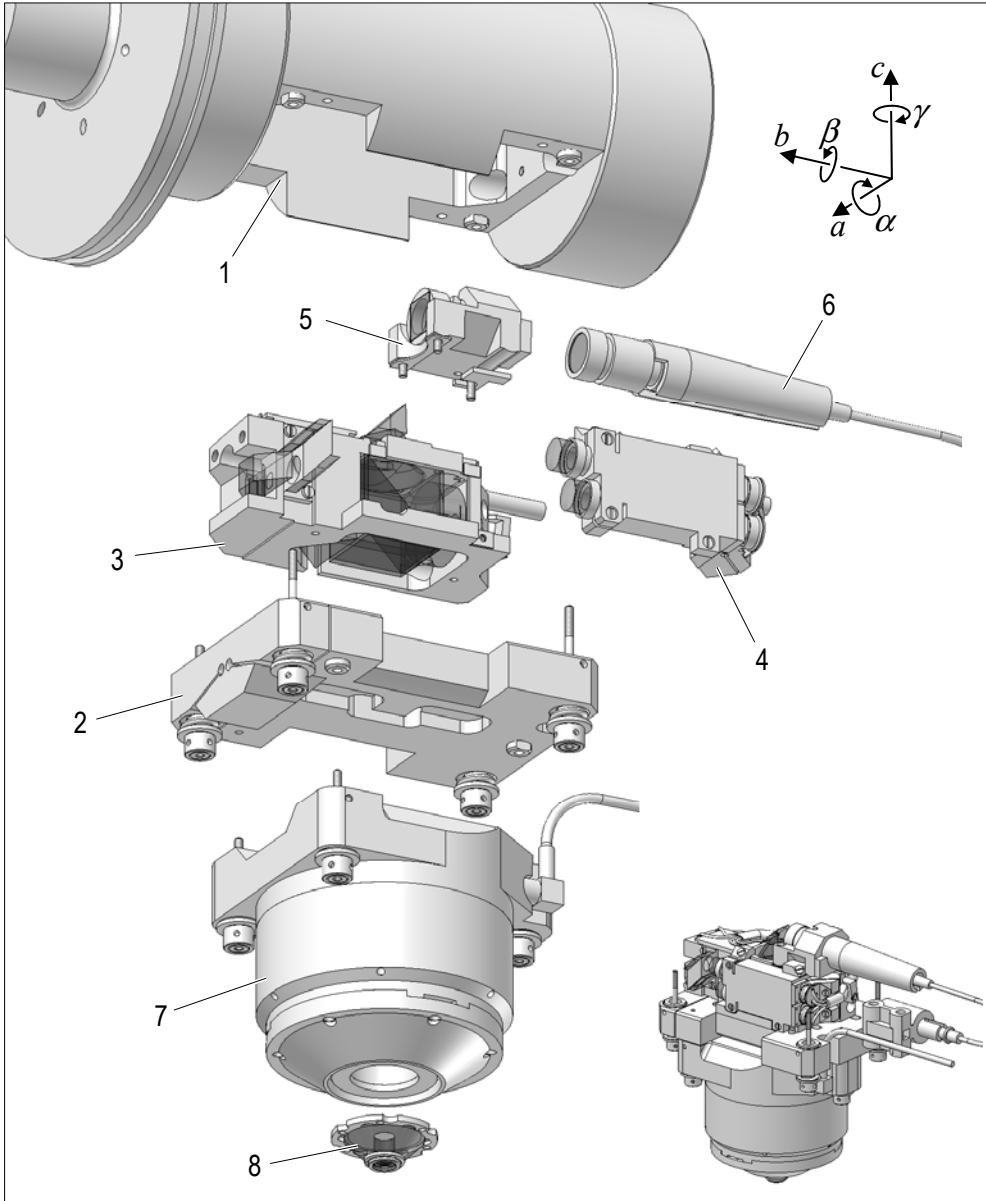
Exploded view showing the subassemblies of the optomechatronic system.
